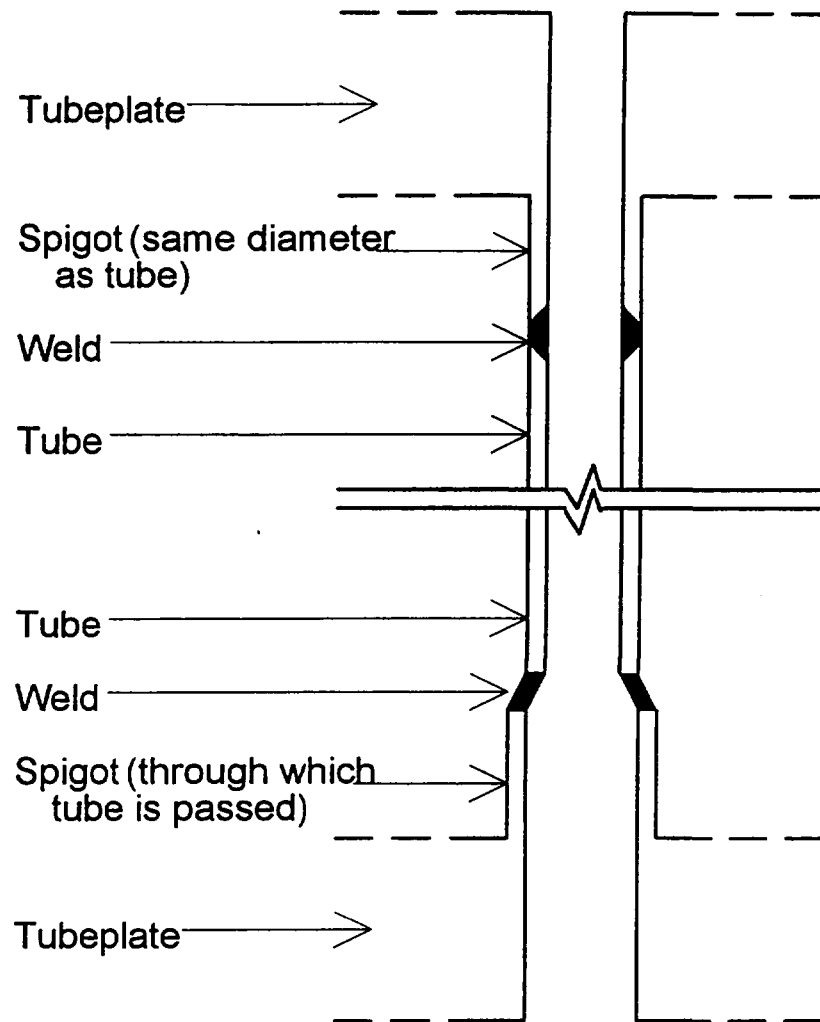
Weldments for a straight-tube steam generator
